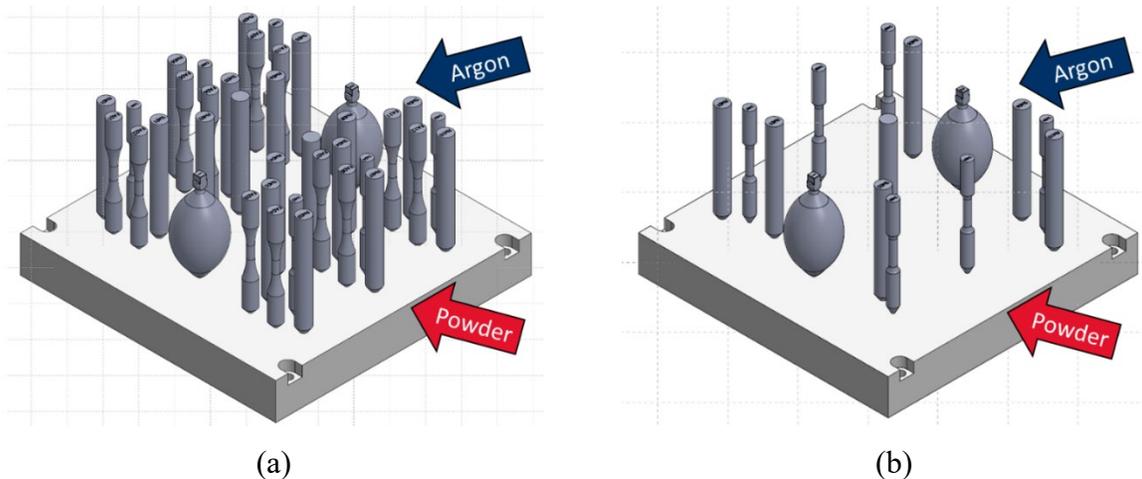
(a) The full and (b) half build layouts including six net-shaped tension test specimens.
